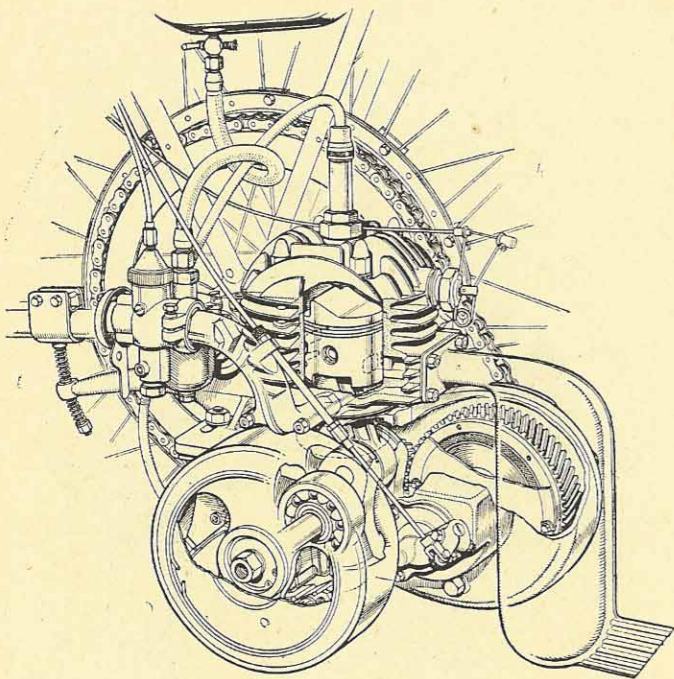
Of French design and manufacture, the 20 lb, 48 c.c. V.A.P. cyclemotor is mounted on an extension screwed to the rear-wheel spindle and drives through a cone-type clutch and a roller chain. The chainwheel, it will be noted, is clipped to the wheel spokes. Helical pinions between the crankshaft and the chain drive provide a primary gear reduction. The springs just in front of the carburettor's air intake control the pivotal movement of the unit about the rear-wheel spindle and thus act as a transmission shock absorber
